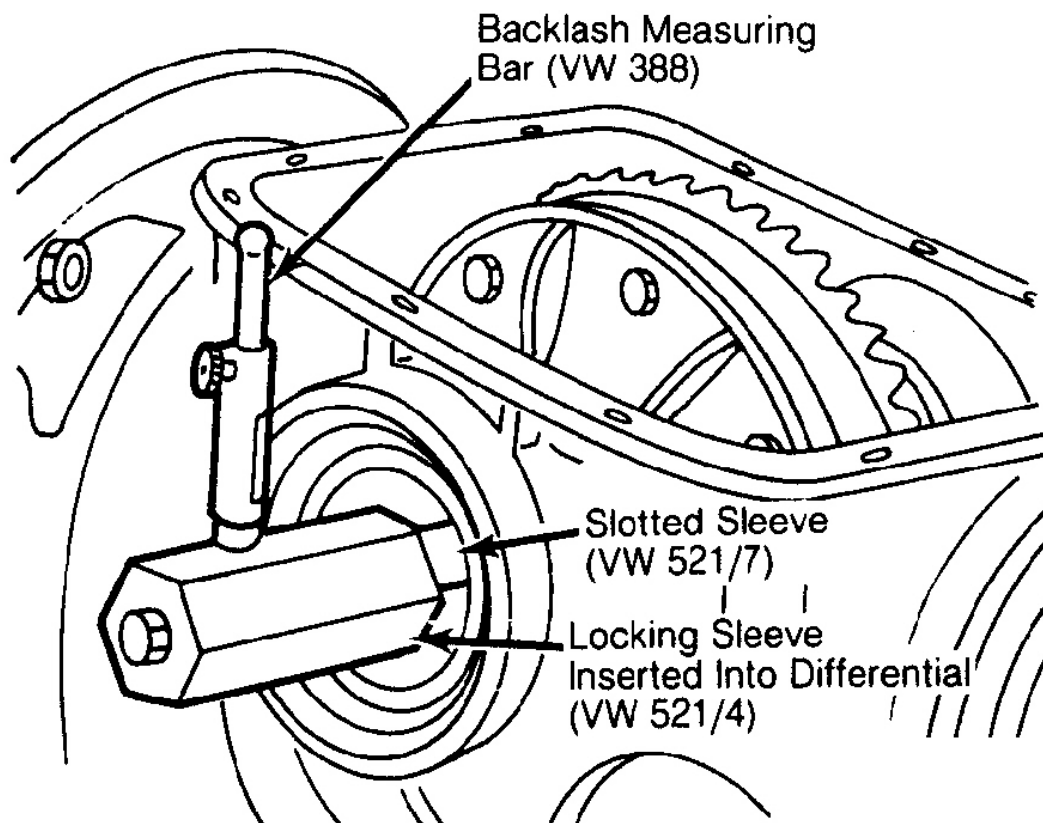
Adjusting Ring Settings For Side Bearing Preload Adjustment
